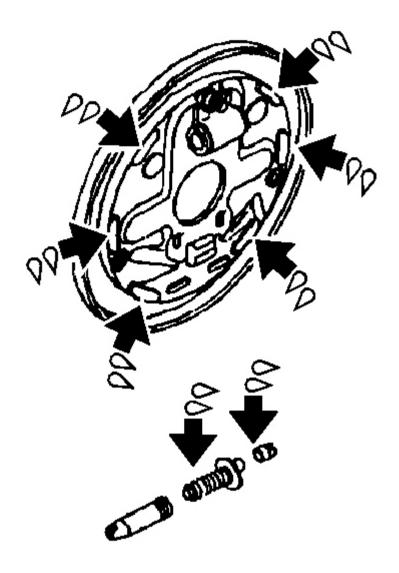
Applying Silicone Brake Lubricant Courtesy of GENERAL MOTORS CORP.
